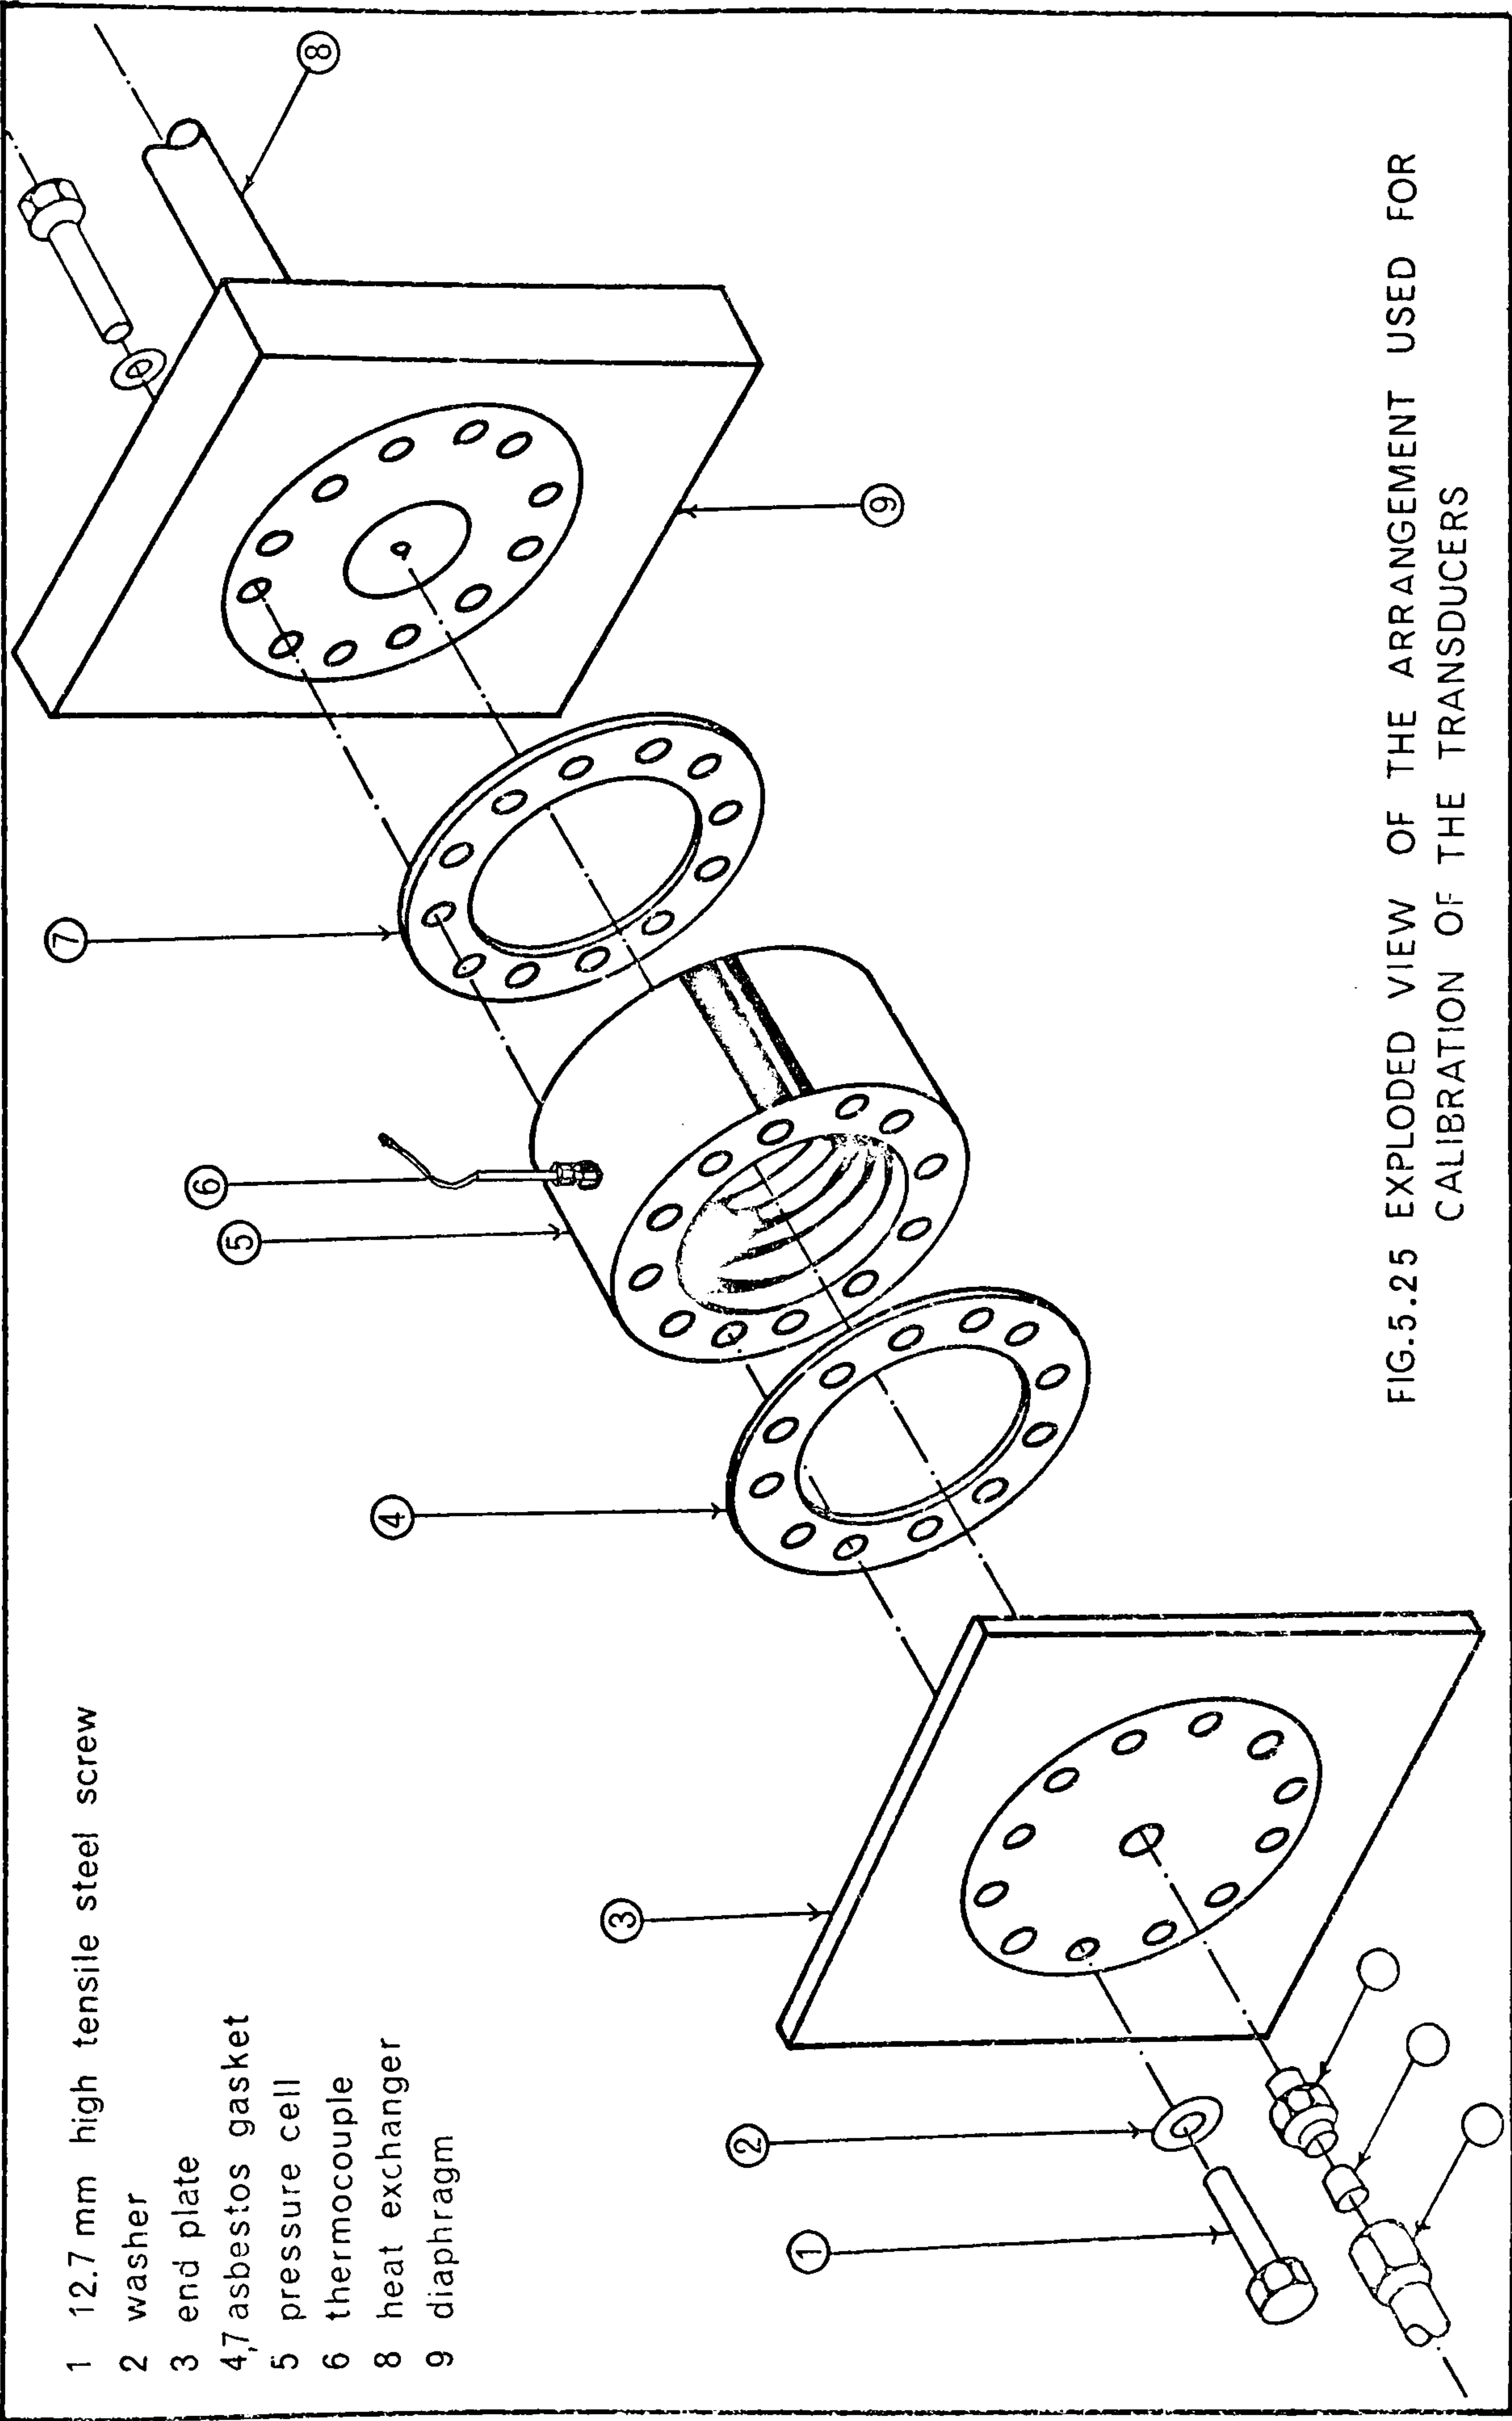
EXPLODED VIEW OF THE ARRANGEMENT USED FOR CALIBRATION OF THE TRANSDUCERS
